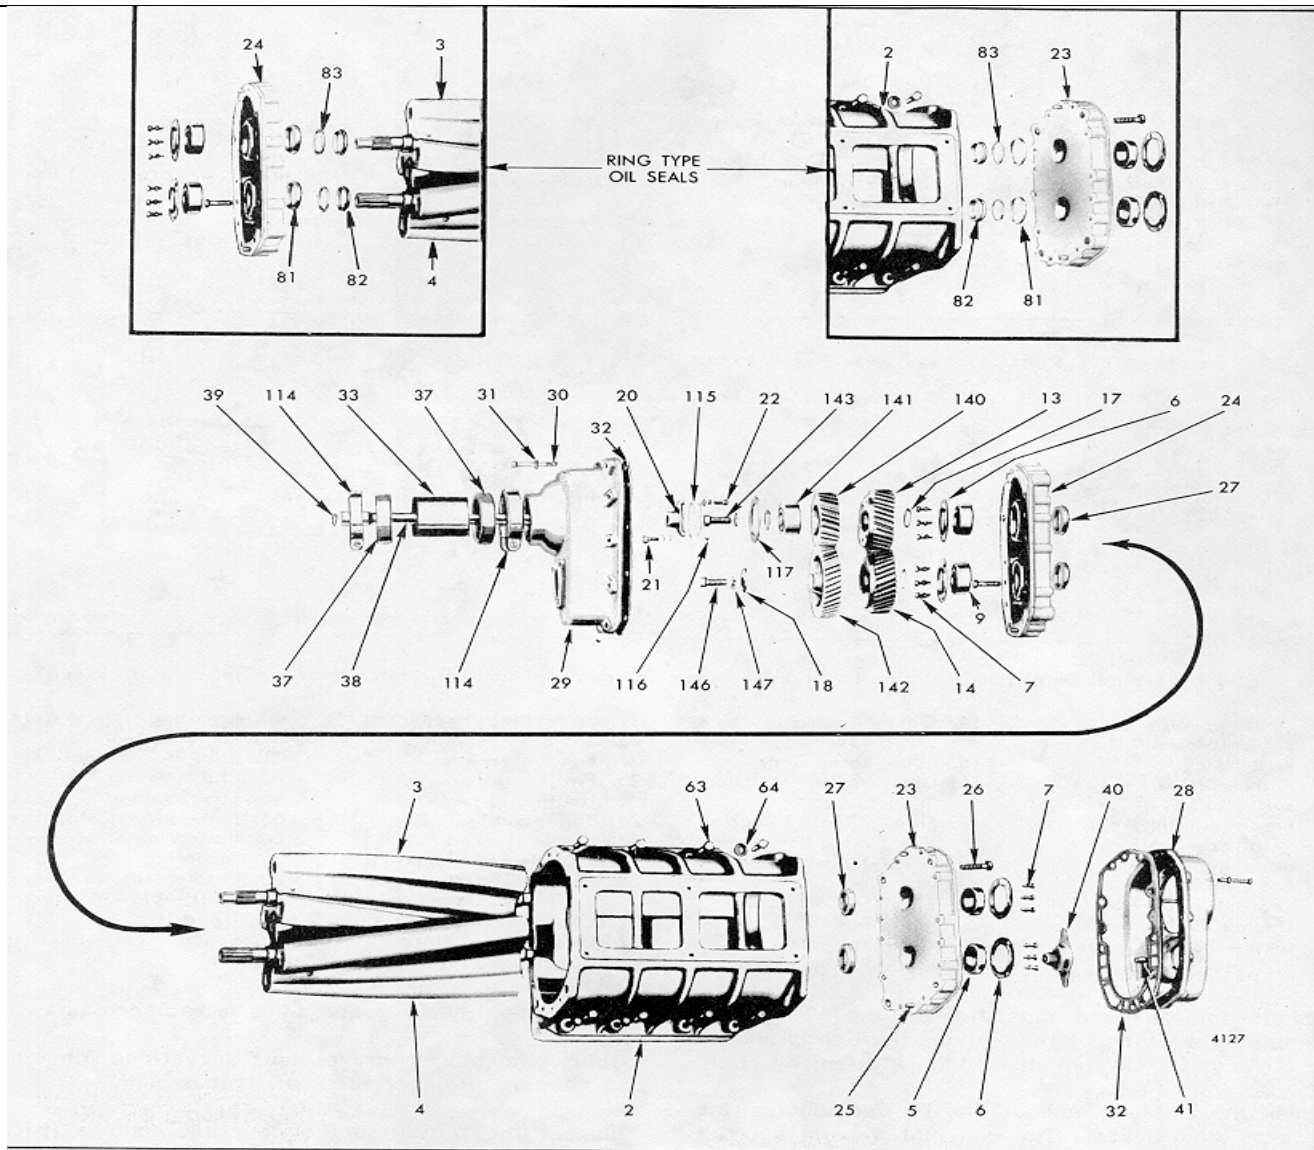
Typical Details and Relative Location of Parts- Six Cylinder Former Reduction Blowers
